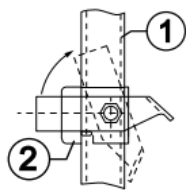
End Stop Assembly (Stainless) - Bottom End Stop (Gated) (P/N 506275)
